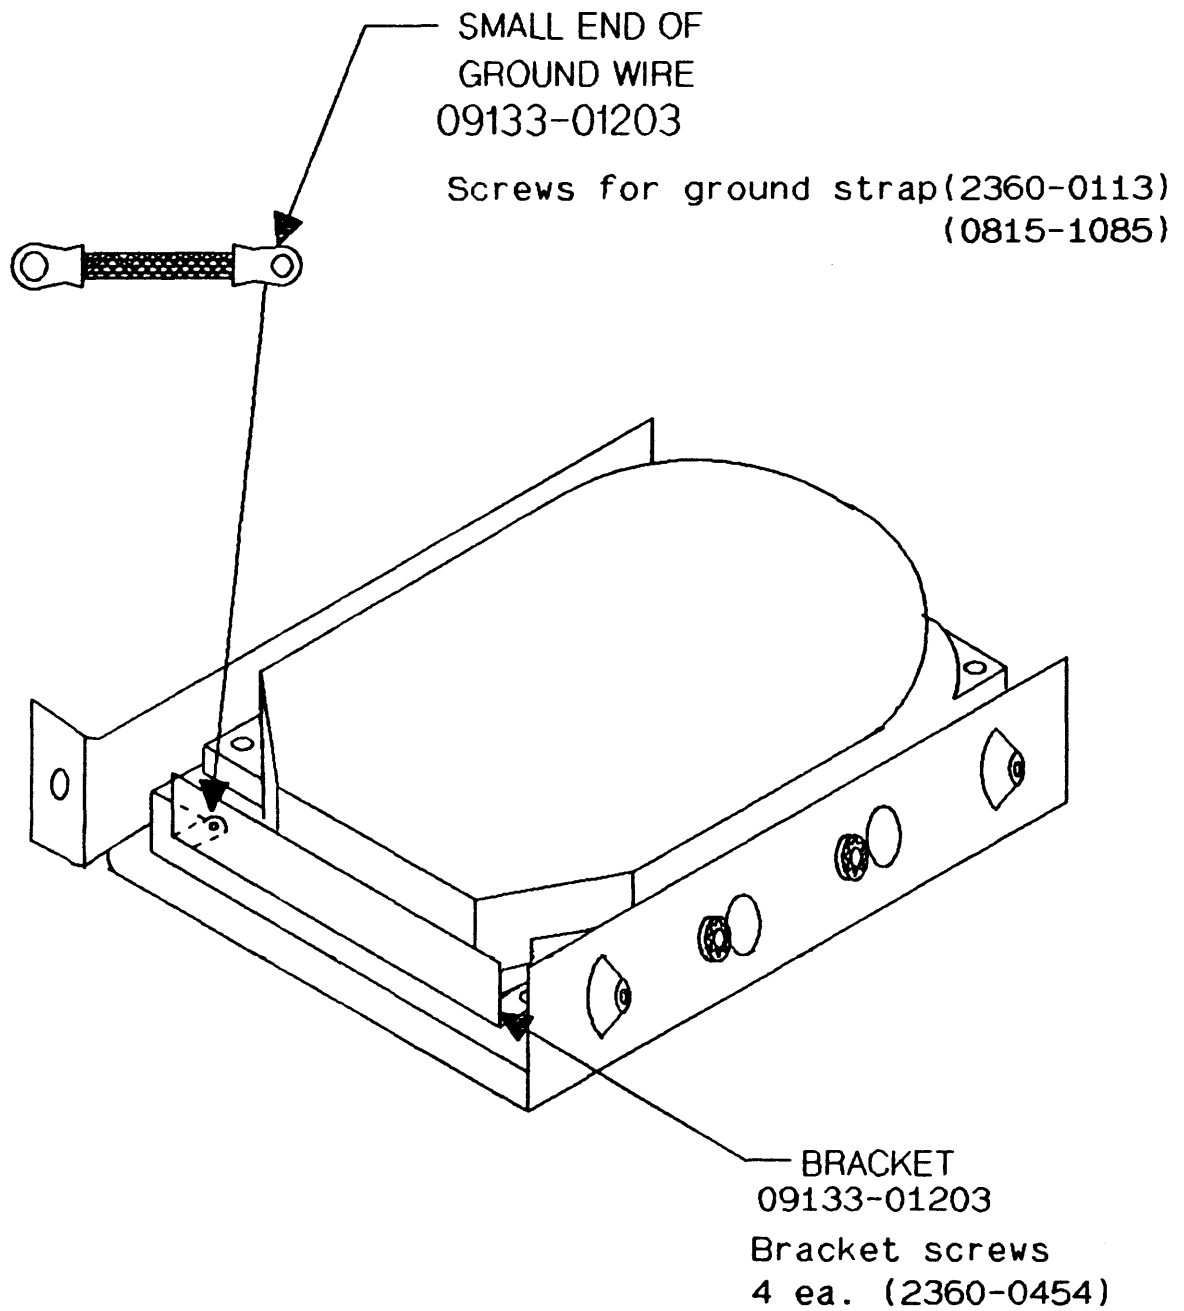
9133/34H and L Winchester mounting bracket.
